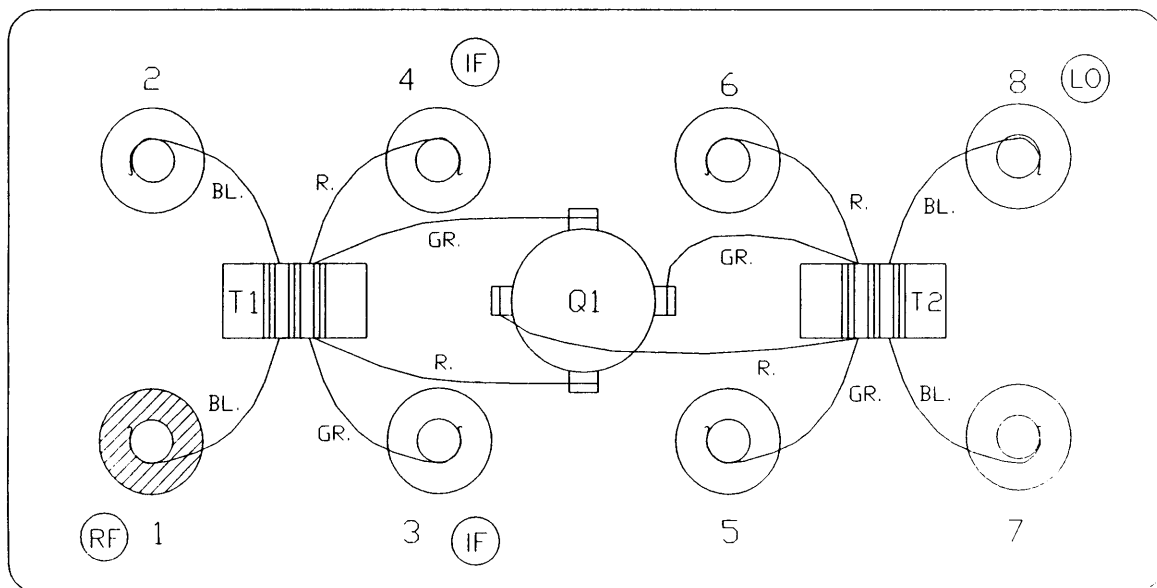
Typical assembly of a double balanced mixer using conventional technique.
